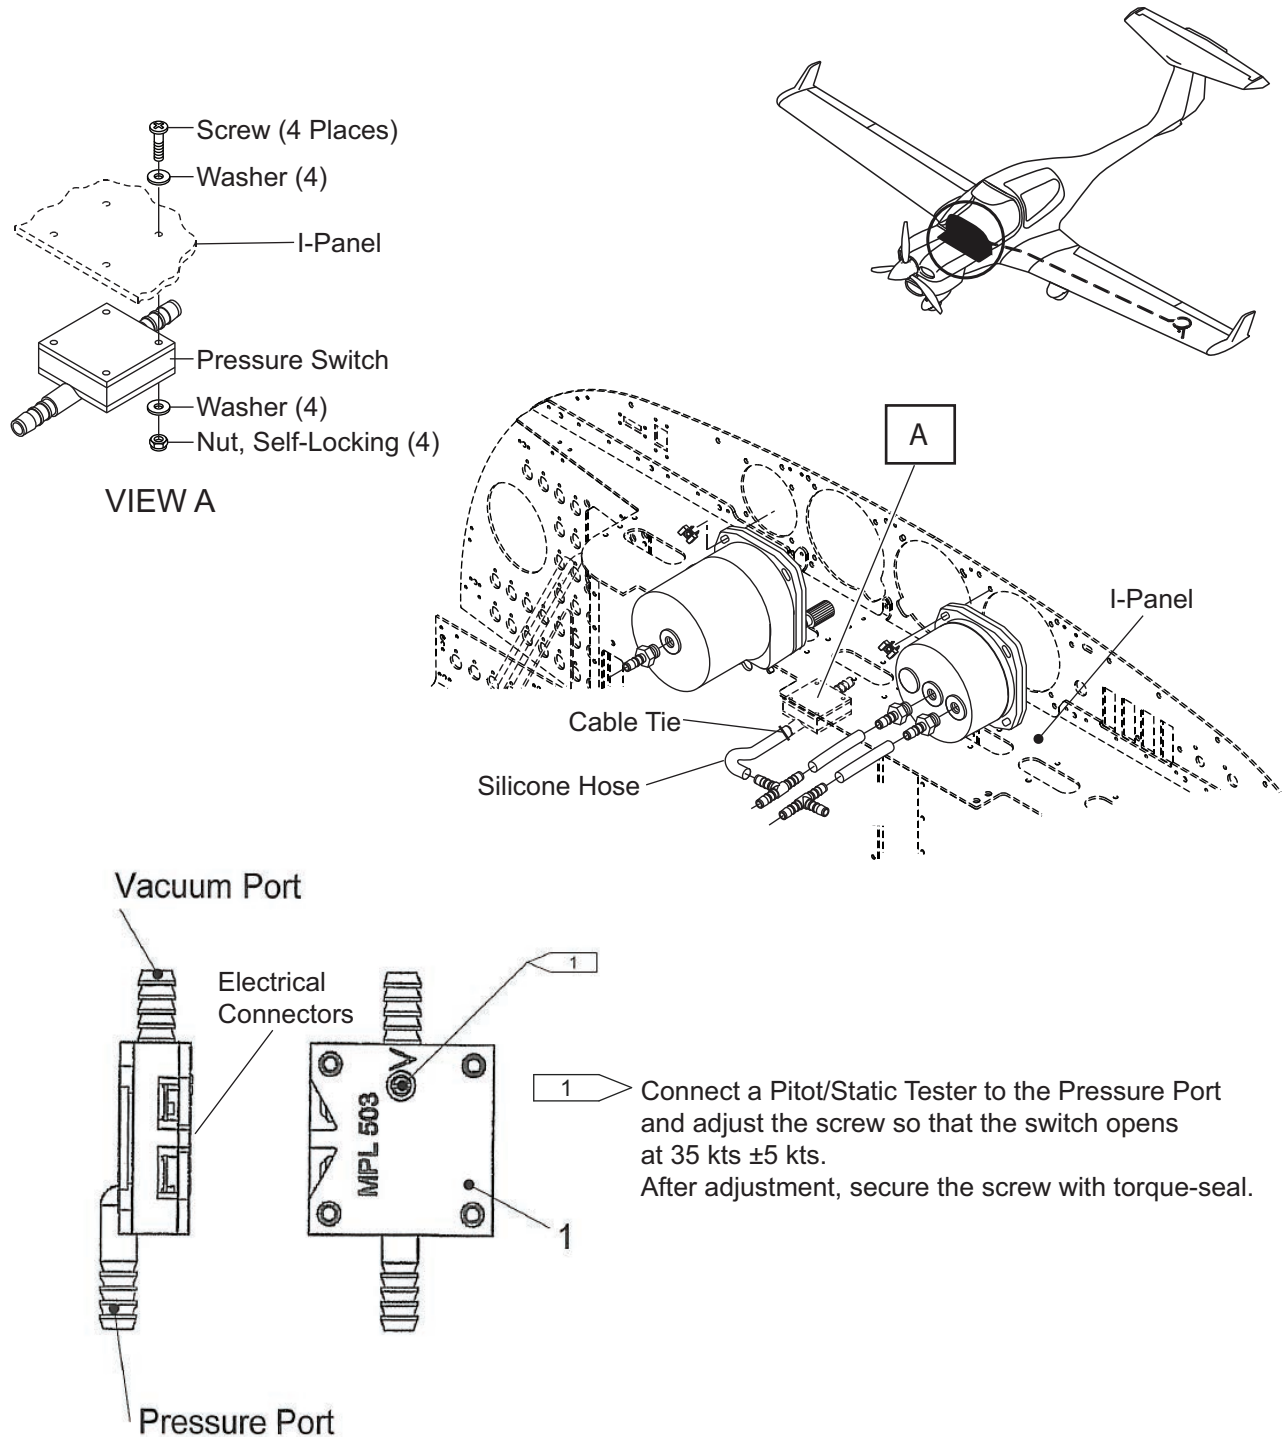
MPL 503 Pressure Switch - Removal/Installation
